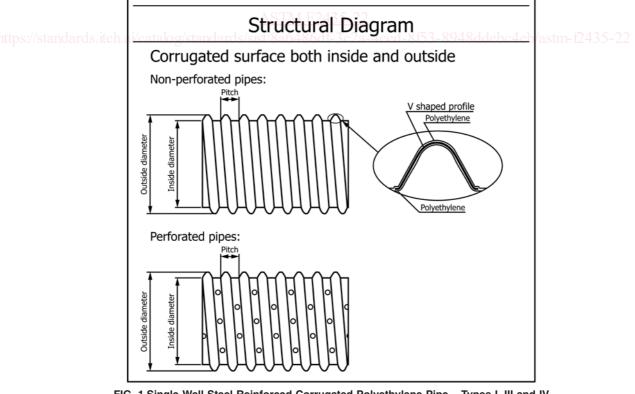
Single-Wall Steel Reinforced Corrugated Polyethylene Pipe – Types I, III and IV
